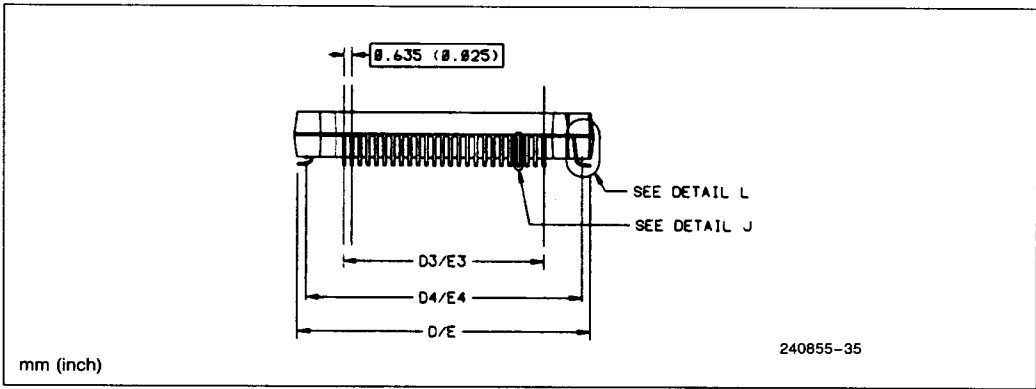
Detailed Dimensions of the 82750DB in the 132-Lead PQFP Package—Molded Details
